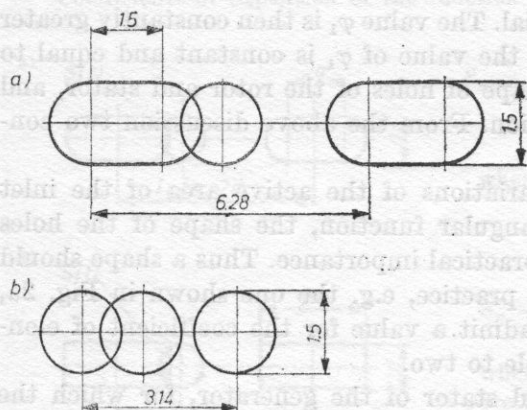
The shapes and geometrical dimensions of the holes of the rotor and stator of the dynamic axial generator tested experimentally
